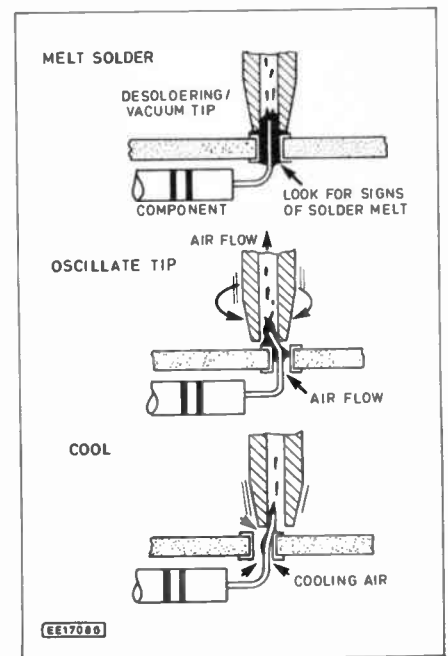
(below) A professional desoldering station. 3.6b. (right) desoldering process.
